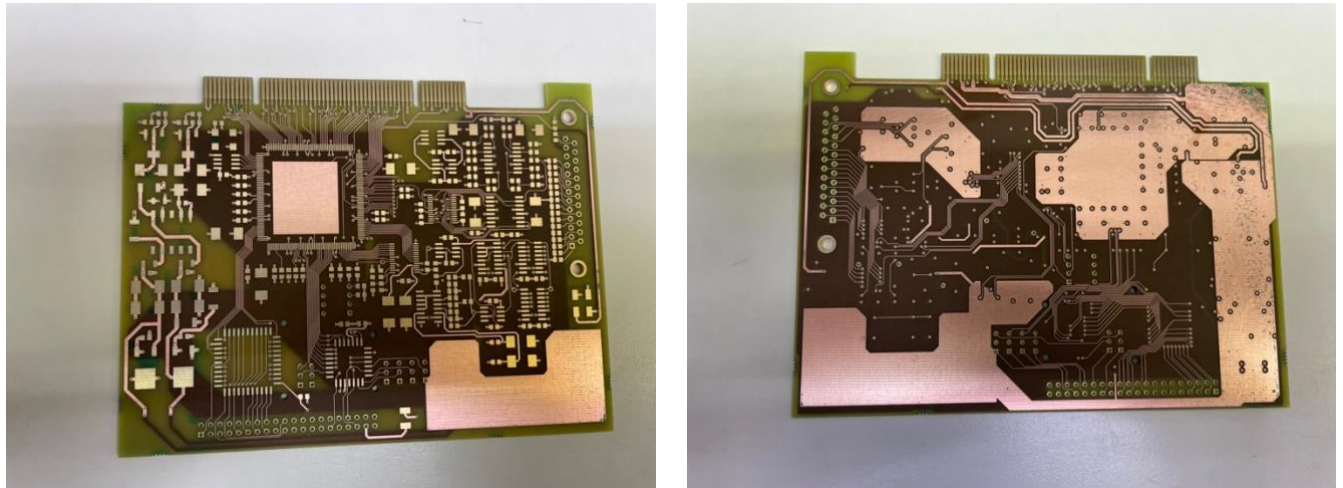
PCB after sodium hydroxide soak for solder mask removal
